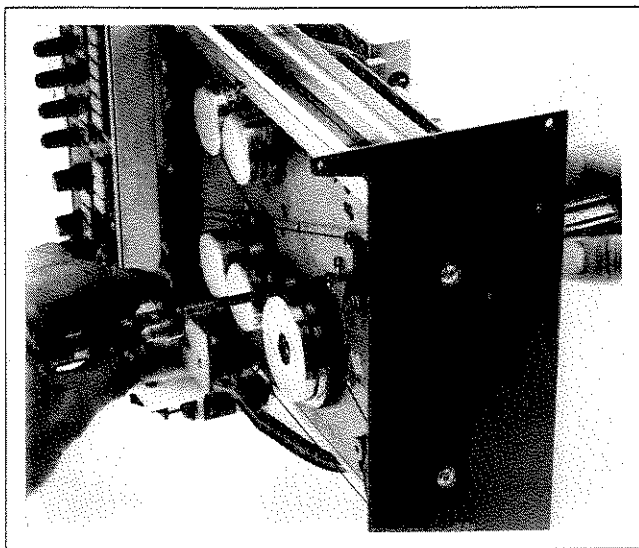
X-Axis Gear Train Backlash Adjustment
